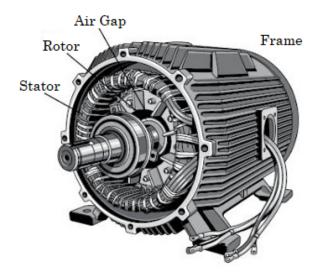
Partially Assembled Motor. An electric motor consists mainly in three parts: a rotor, which moves due to the electromagnetic interaction; a stator, the body of the motor; and a frame, which holds the rotor and the stator together. The air gap is the space between the rotor and the stator, where the electromagnetic interaction takes place (*Electrical Motors Basic Components*, 2012).
